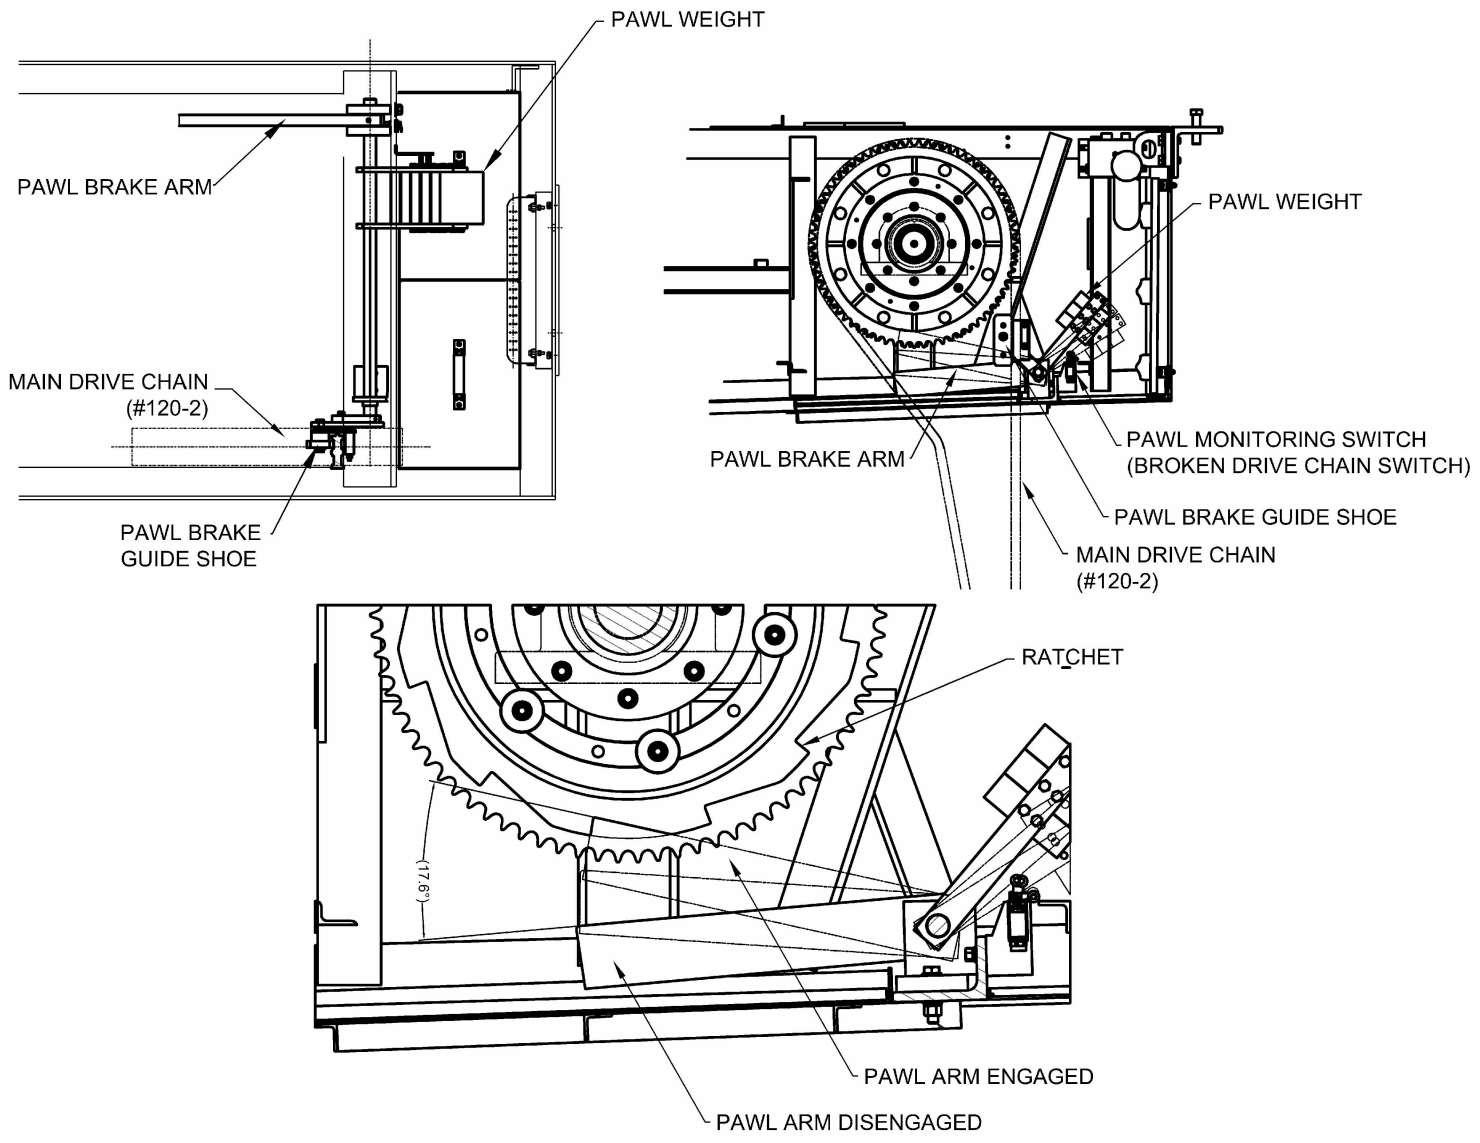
Pawl Brake (Main Drive Shaft Brake)
